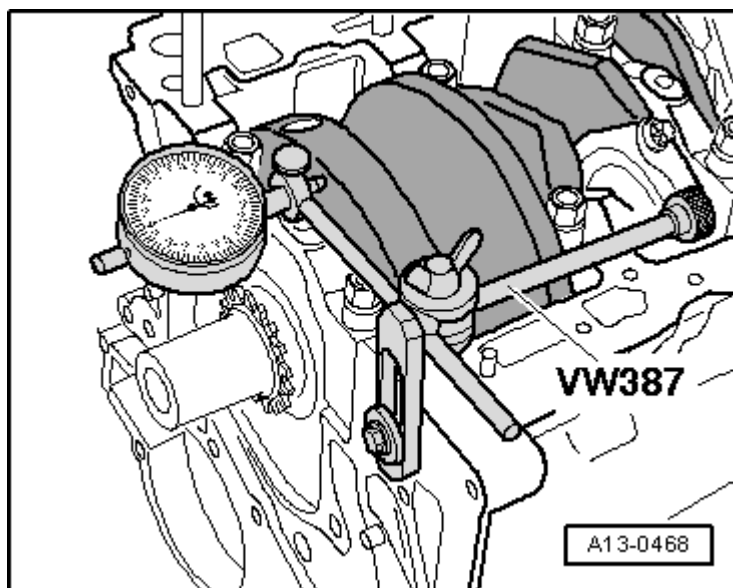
Identifying Dial Indicator Attached Together With VW387 Dial Gauge Holder To Cylinder Block
